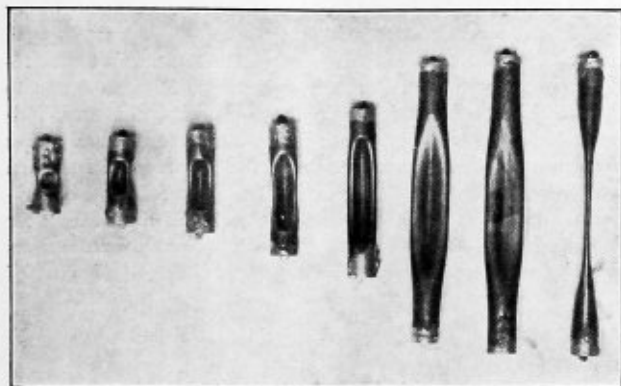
SPECIMENS OF COLLAPSED BRASS TUBES.
